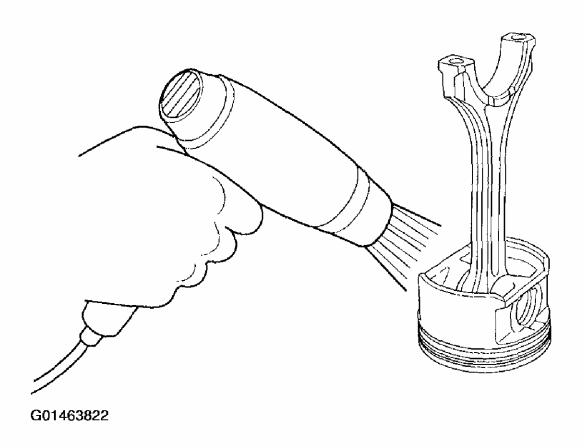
Heating The Piston & Connecting Rod Assembly Courtesy of AMERICAN HONDA MOTOR CO., INC.
